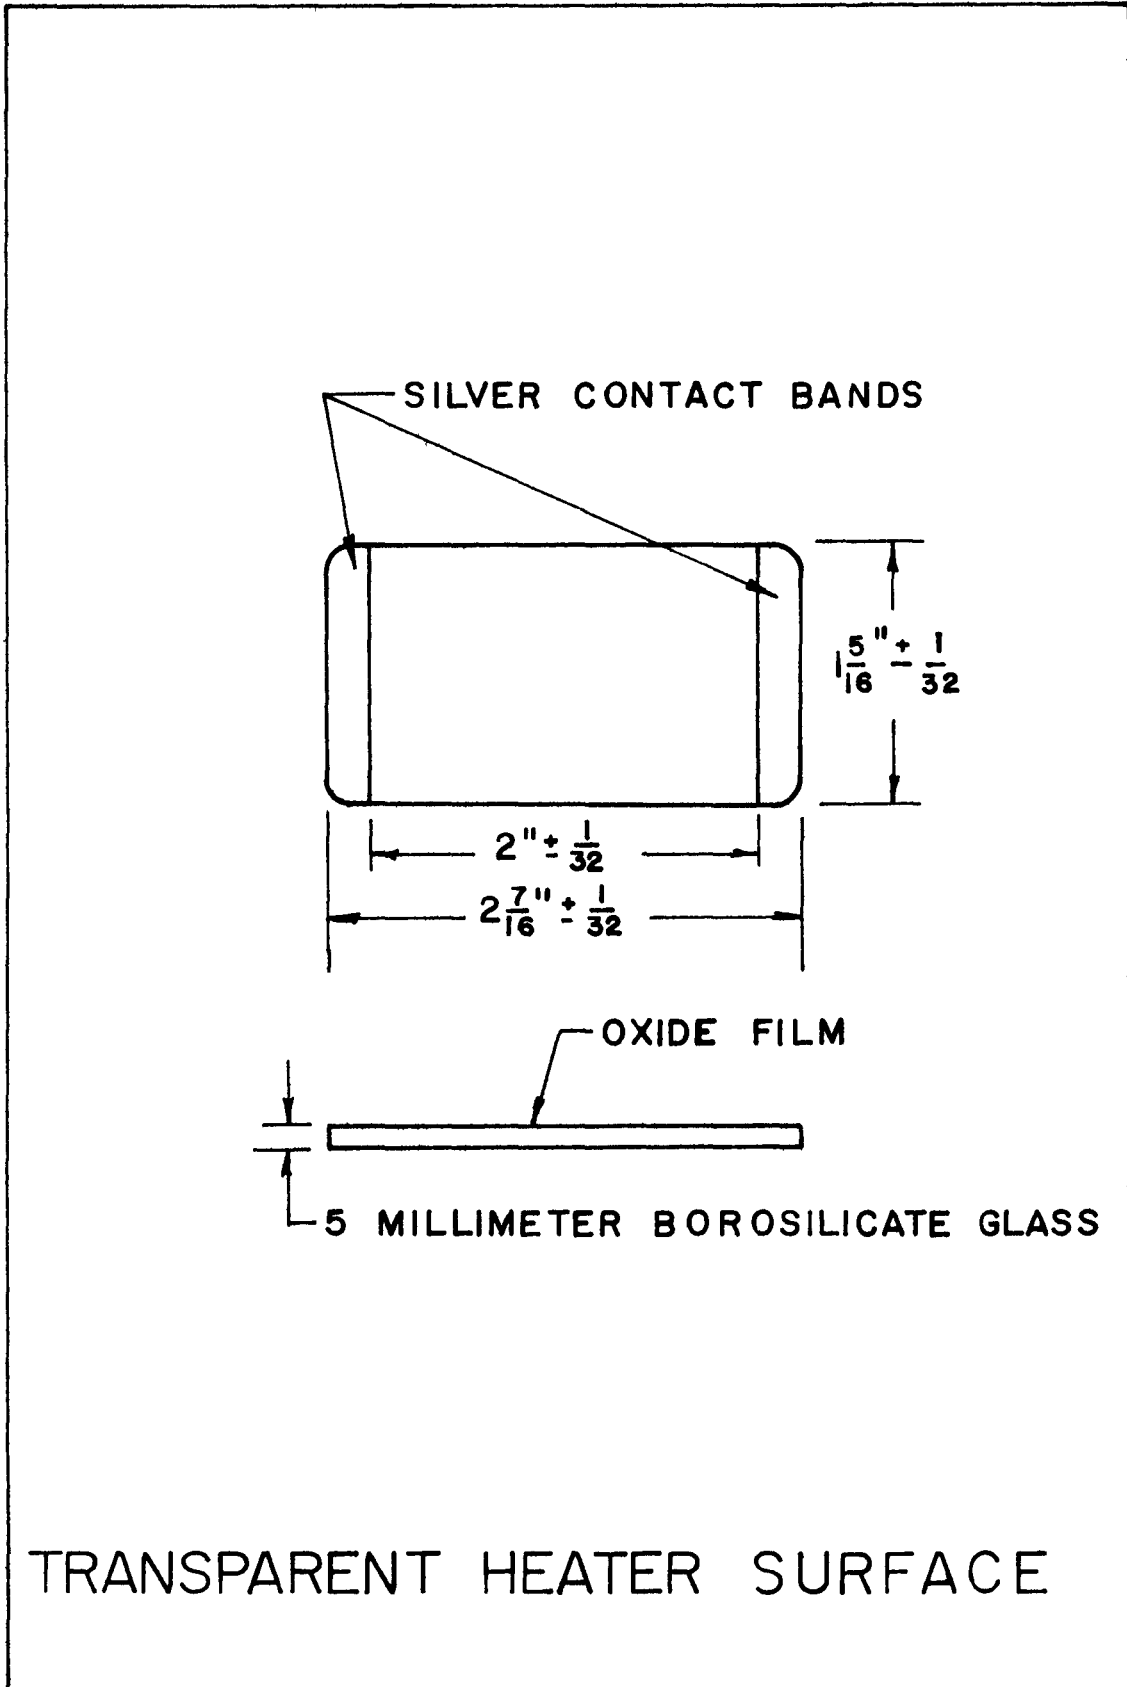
DRAWING OF TRANSPARENT HEATER SURFACE
